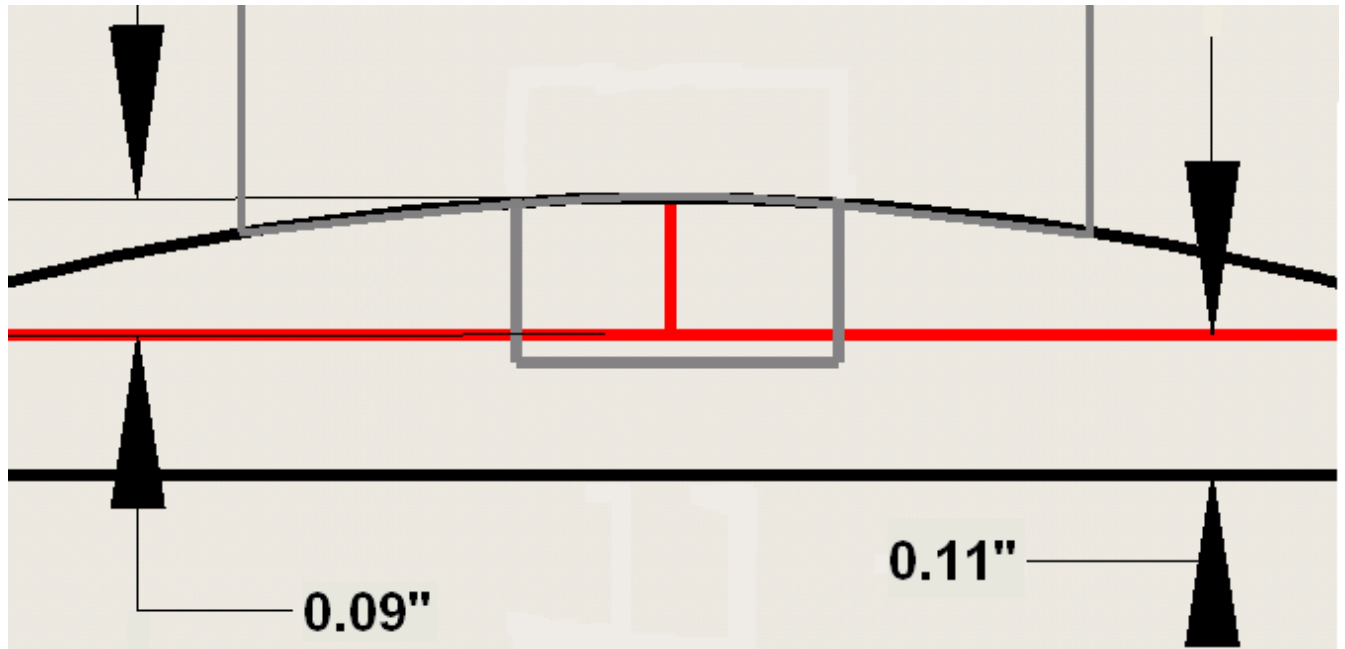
Anvil-less butt/lap type weld joining 3 material sections and not performed in the experiments presented in this work. The joint and materials could alternatively be configured with the lateral interface following the curvature of the top surface. Unsupported welds of this kind with a traditional FSW tool create a bead type defect on the underside. A shoulder-less, conical tool was used in unsupported welds in the experiment.
